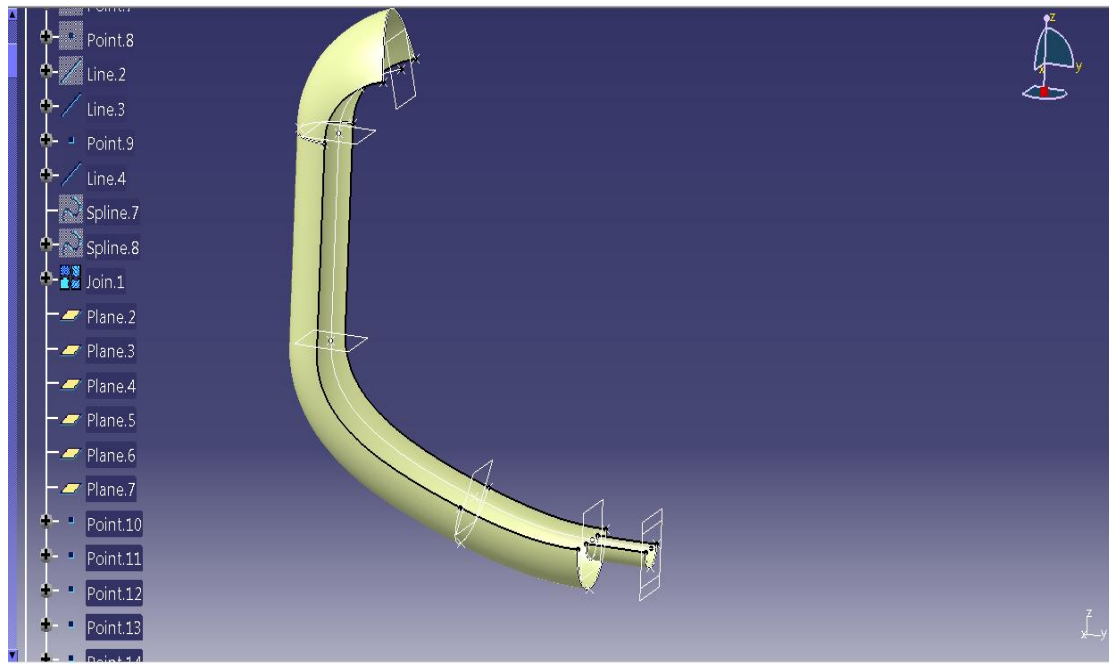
Multi-sections surface of the steering wheel module.
